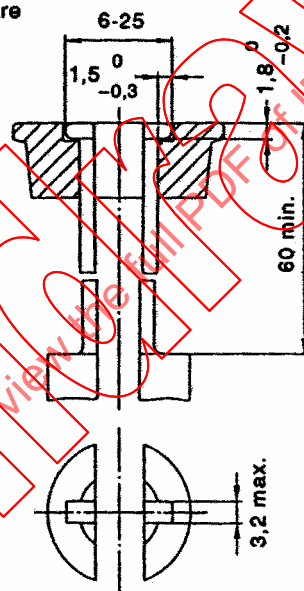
Gauge-piece and hand-key, D-type. Sizes DII to DIV
